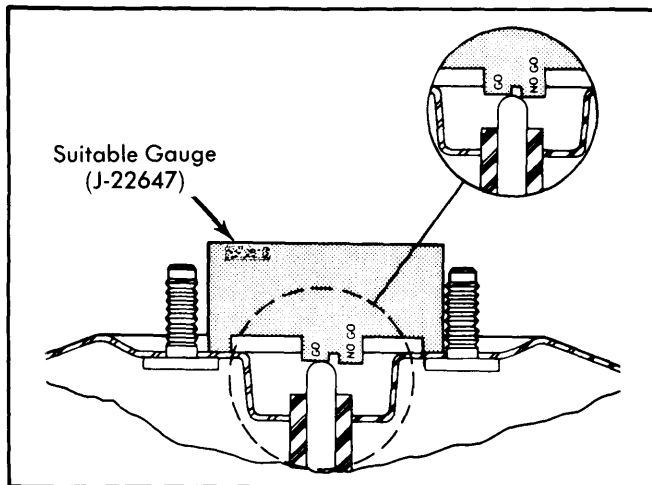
Checking Push Rod Height Chevrolet and GMC Models
